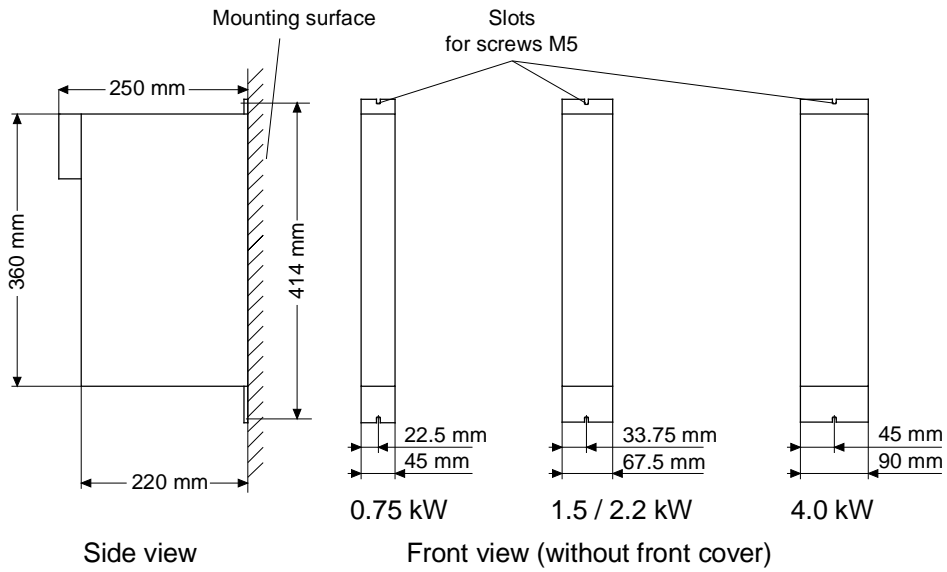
Dimension drawings for housings up to 90 mm wide
